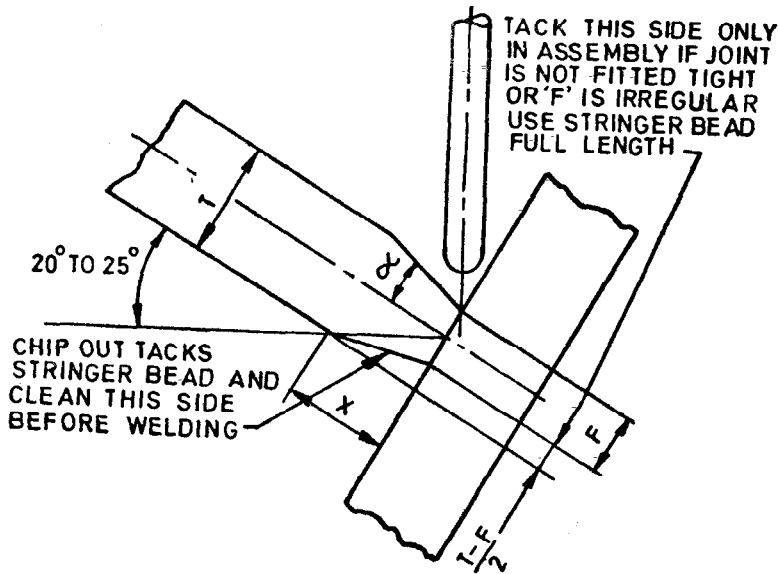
FILLET WELDS IN FLAT POSITION ( WELDING WIRE VERTICAL )
